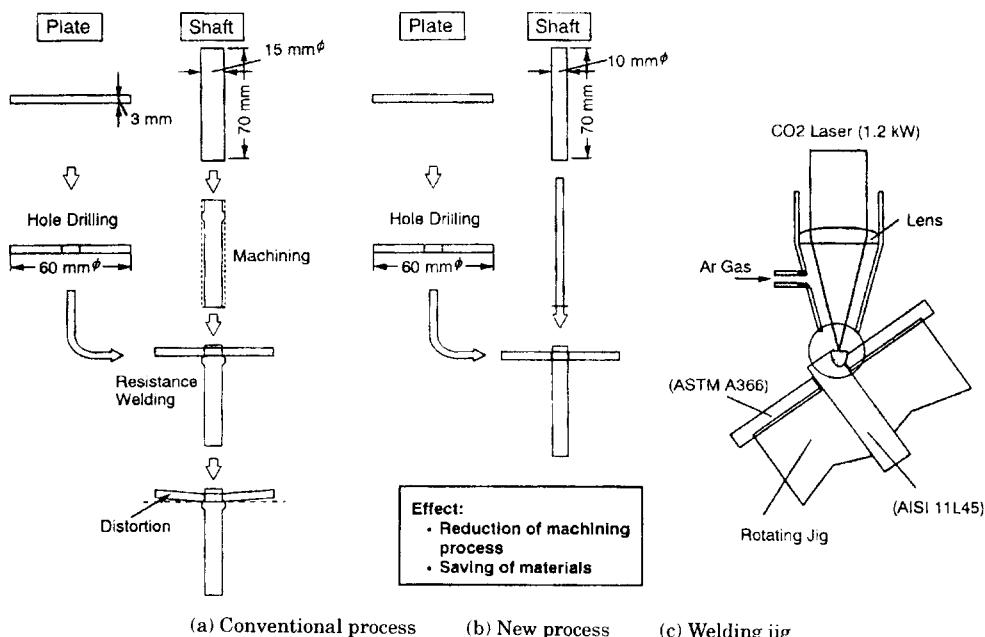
Change in welding process of rotating parts used for automobile [5]
